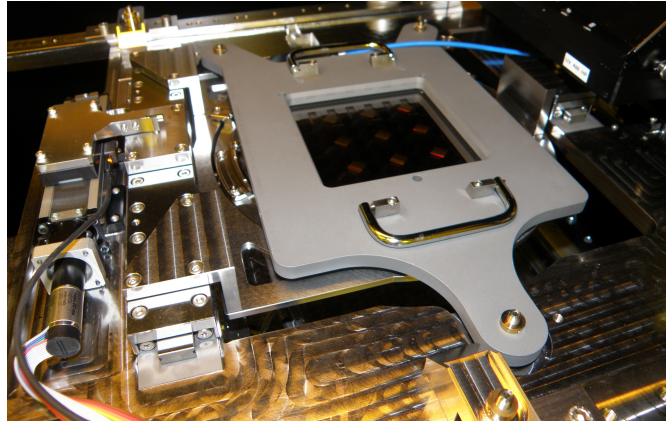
Picture of the mask chuck, mounted on the MPL scanner.
